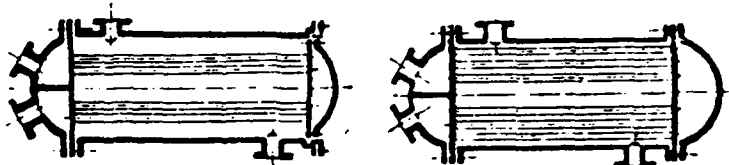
Diagram of heat exchanger with mobile tube plate and cover/cap.
